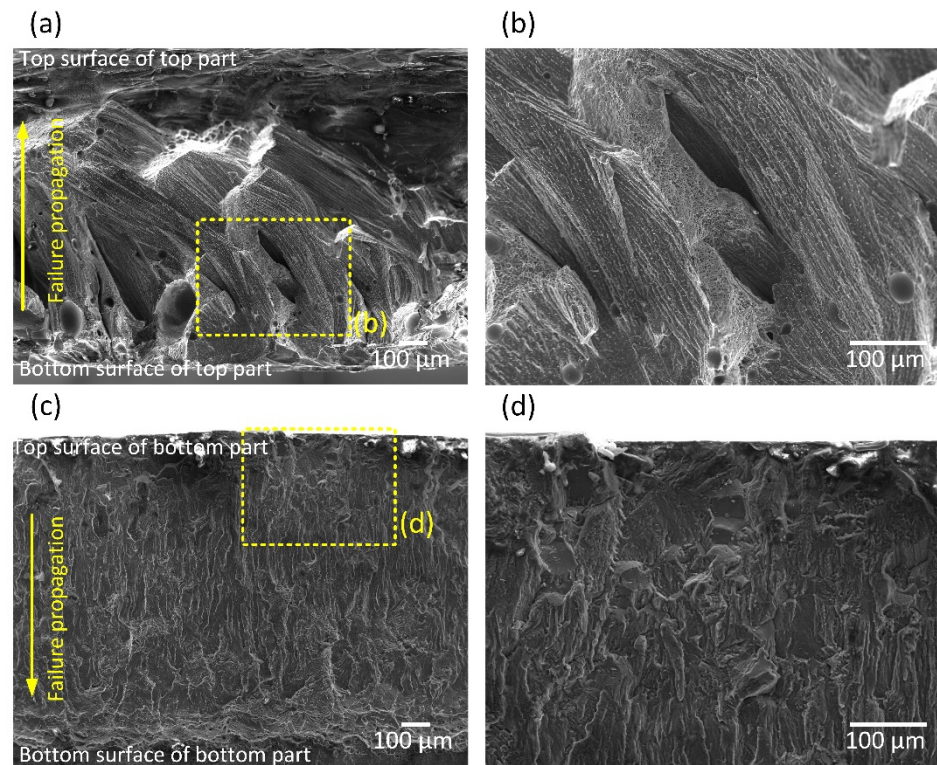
Representative fatigue fractography of (a) the fusion zone failure and (c) the weld root failure, with detailed views in (b) and (d).
